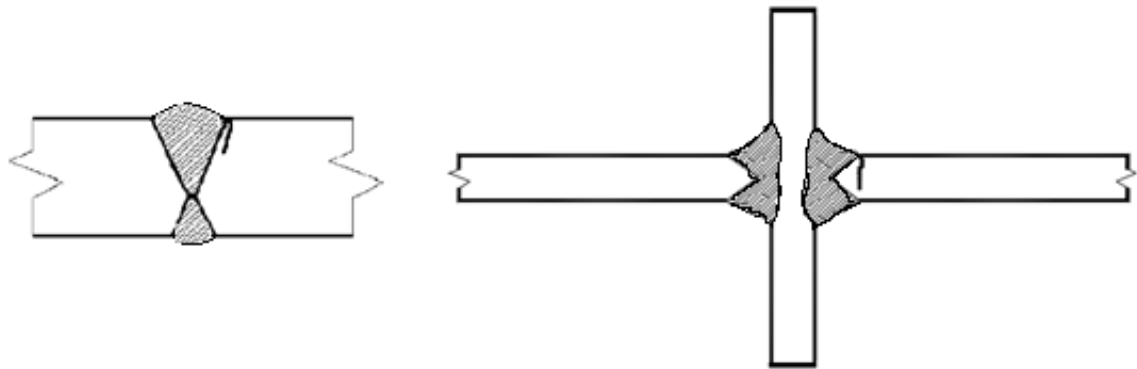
Typical crack location for the full penetration butt weld (left) and T-joint (right).
